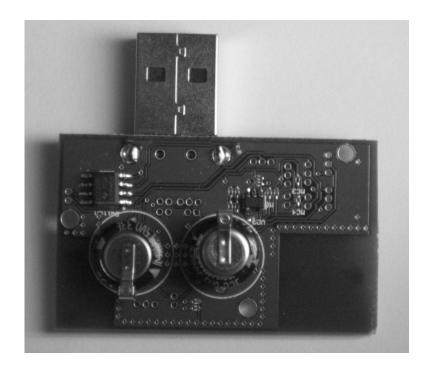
Photograph of the front-view test printed circuit board (PCB).
